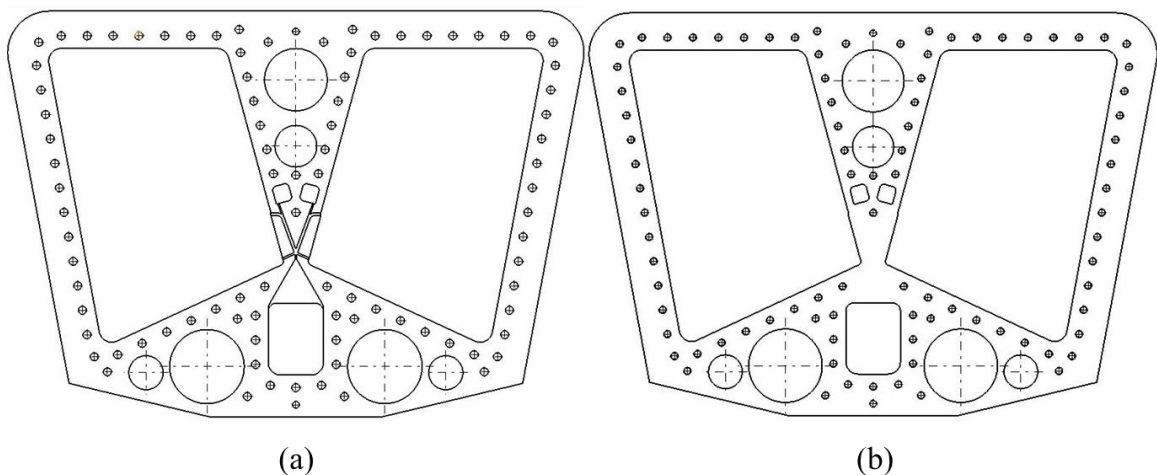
CAD views of SFO faces with the addition of bolt holes used for mounting
